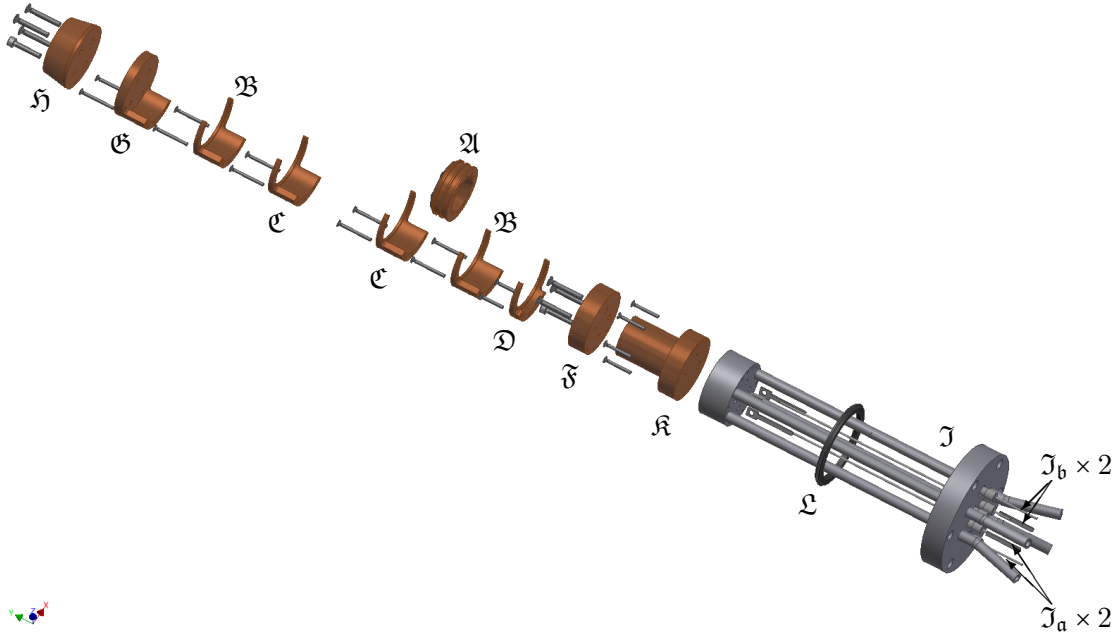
Assembly of the Sample Storage System — Ten samples (A, one shown) can be inserted into nine stacked holding pieces (B, C, only two shown each) and an initial, shorter holder (D). The top (F) and the, by a spacer (E) separated, bottom piece (G) have Type K thermocouples^a attached. The latter are wired to two Type K thermocouple feedthroughs^b (K_a, K_b) welded into the base flange (I, length of cooling lines reduced for clarity). The end piece (H) near the mounting flange (I) has an attached heater (K) which is counter cooled. Since this assembly is removed quite often, it is sealed by a reusable 40CF rubber gasket^c (J, black) which is also used to align the sample holders to the transfer system.
